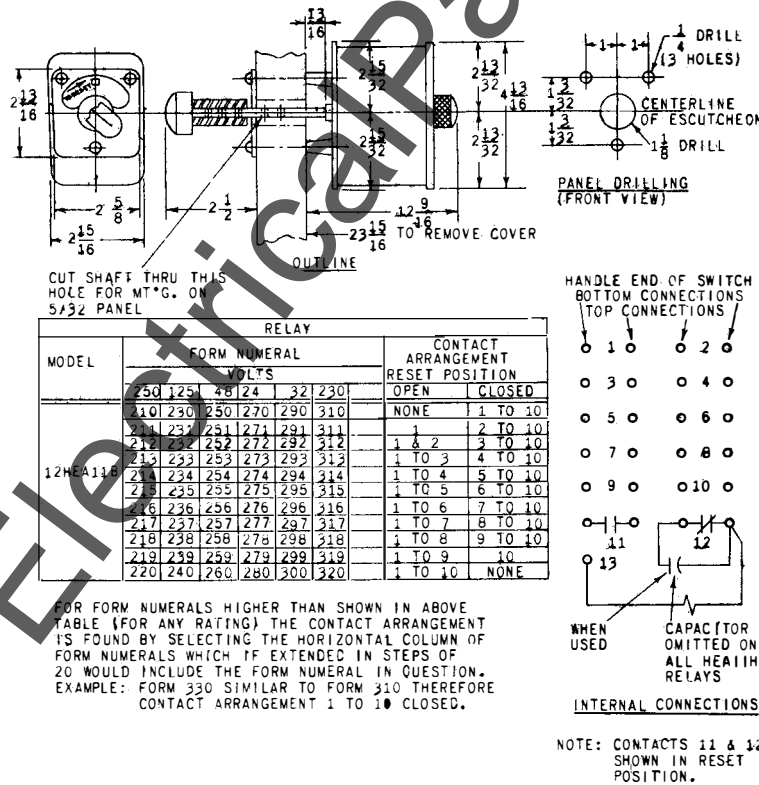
Outline, Panel Drilling And Internal Connections For Type HEA11B Relay
